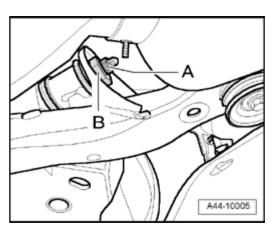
Identifying Nut And Adjustment Screw Courtesy of VOLKSWAGEN UNITED STATES, INC.
